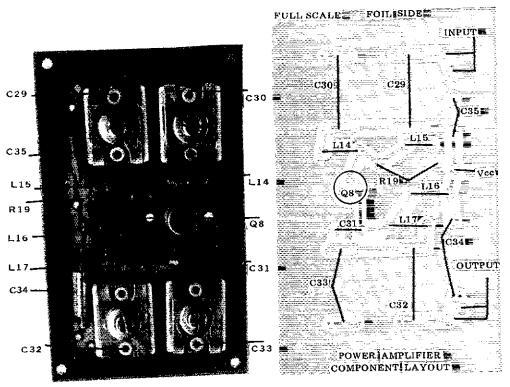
Full-size template and parts placement for the power-amplifier board.
